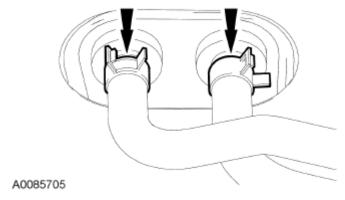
Locating Vacuum Supply Tube Courtesy of FORD MOTOR CO.
